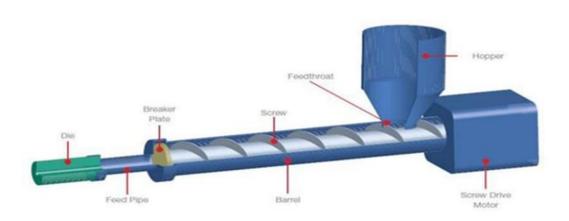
Tubing Extrusion Machine. (http17)
